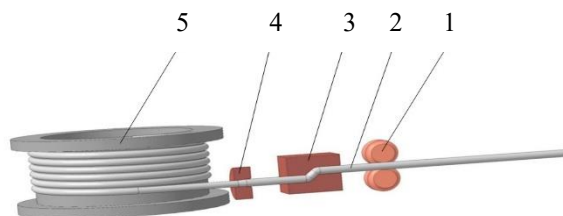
ECAP method: 1-guide roller; 2-wire; 3-die with equal angle channels; 4-die; 5-winding drum.
